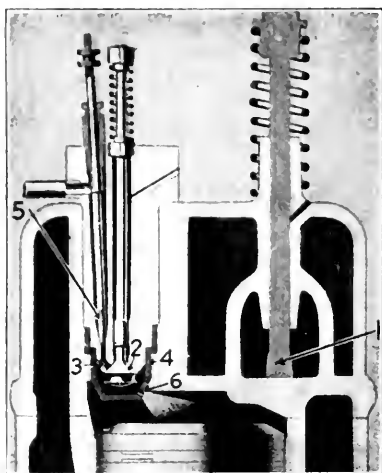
CROSS-SECTION OF THE INJECTOR VALVE OF THE HVID ENGINE
